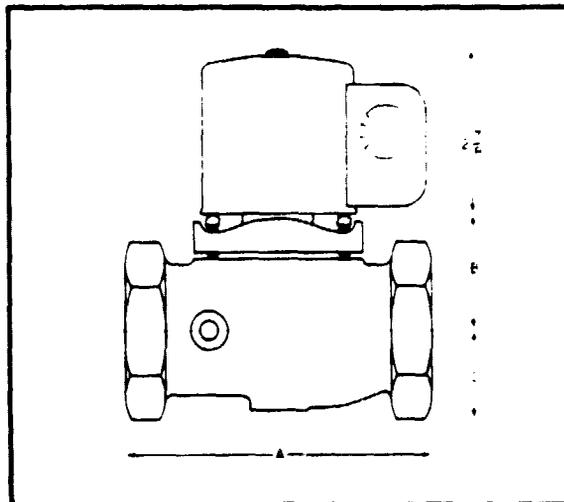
OUTLINE DIMENSIONS OF 1-1/4, 1-1/2 INCH VALVES.
